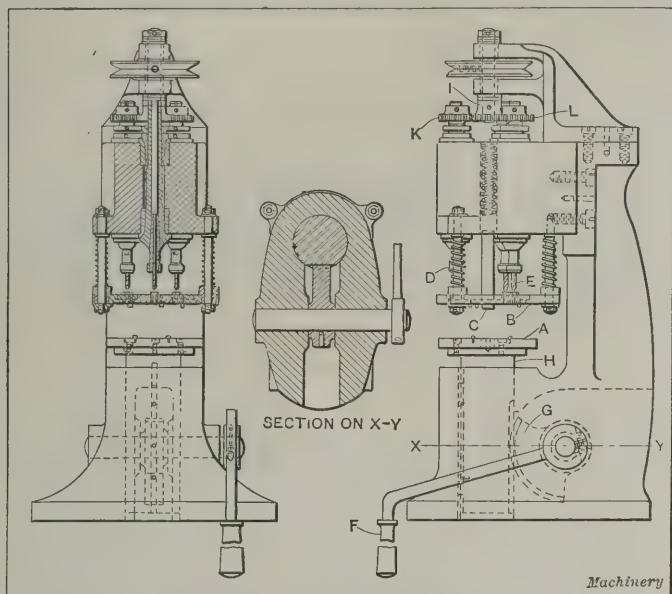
Construction of Three-spindle Drilling Machine shown in Fig. 20
